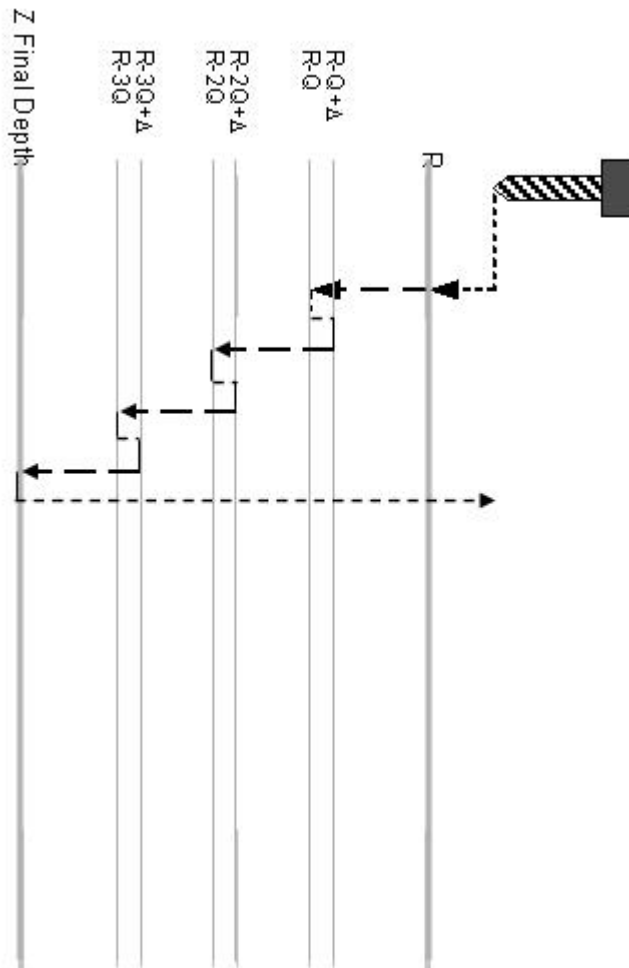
Tool Motion for G73 Chip Break Drill Cycle
